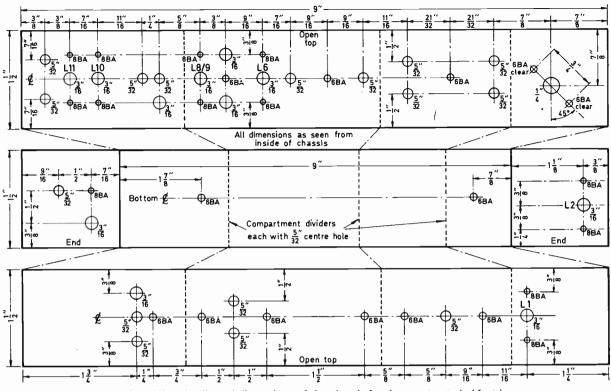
Drilling details and dimensions of the chassis for the constructor's i.f. strip.
